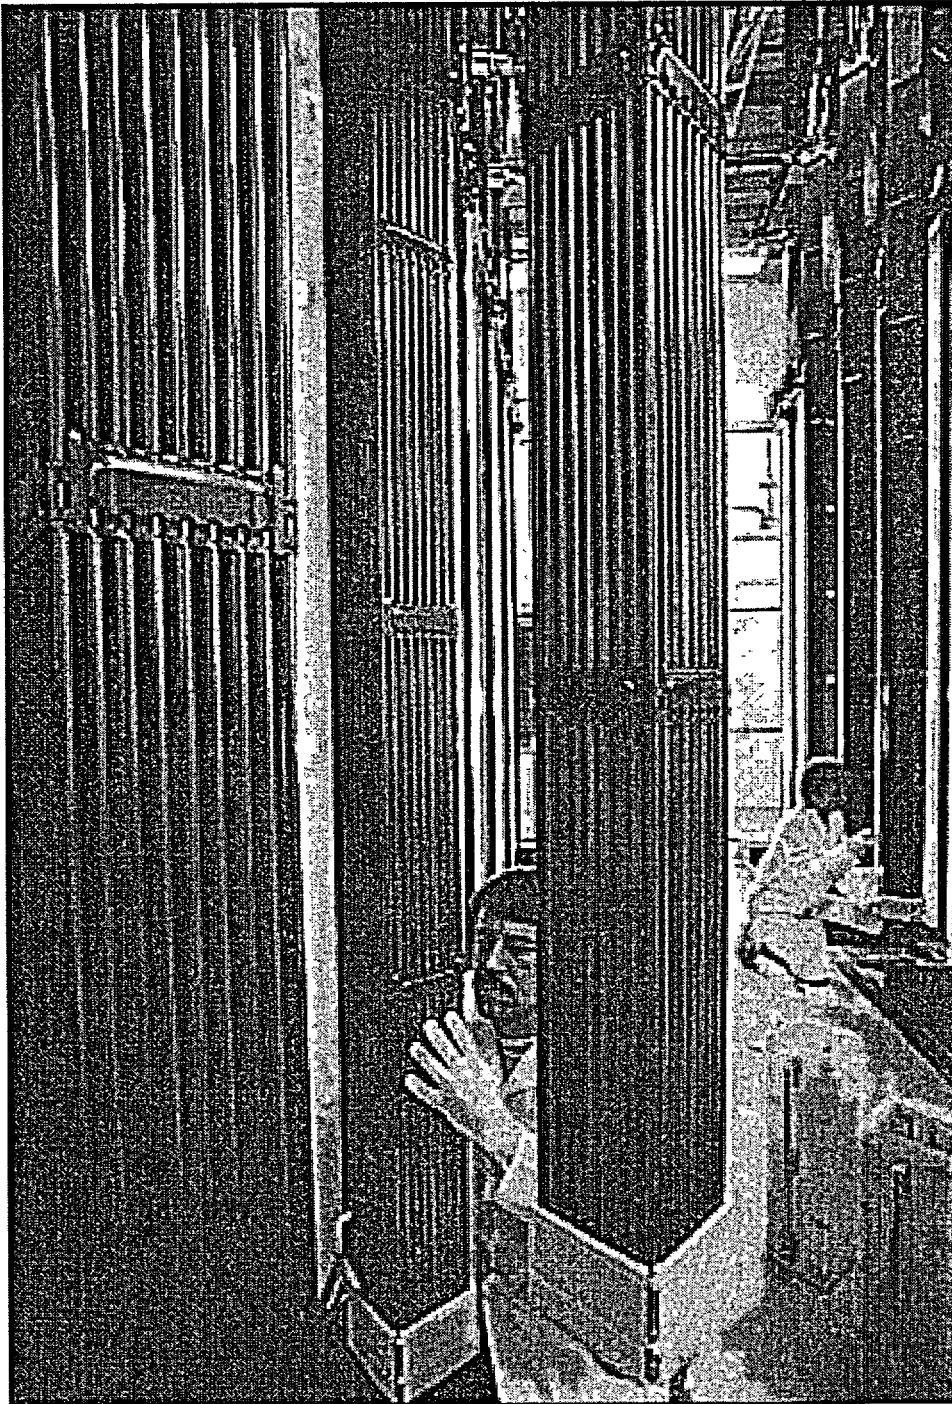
Typical UO₂ PWR Assembly (MOX Assemblies Similar)
